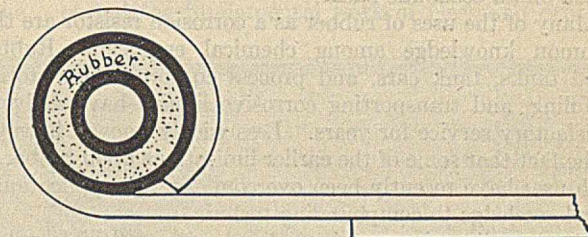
Rubber Torsion Bushing Installed in a Spring Eye
